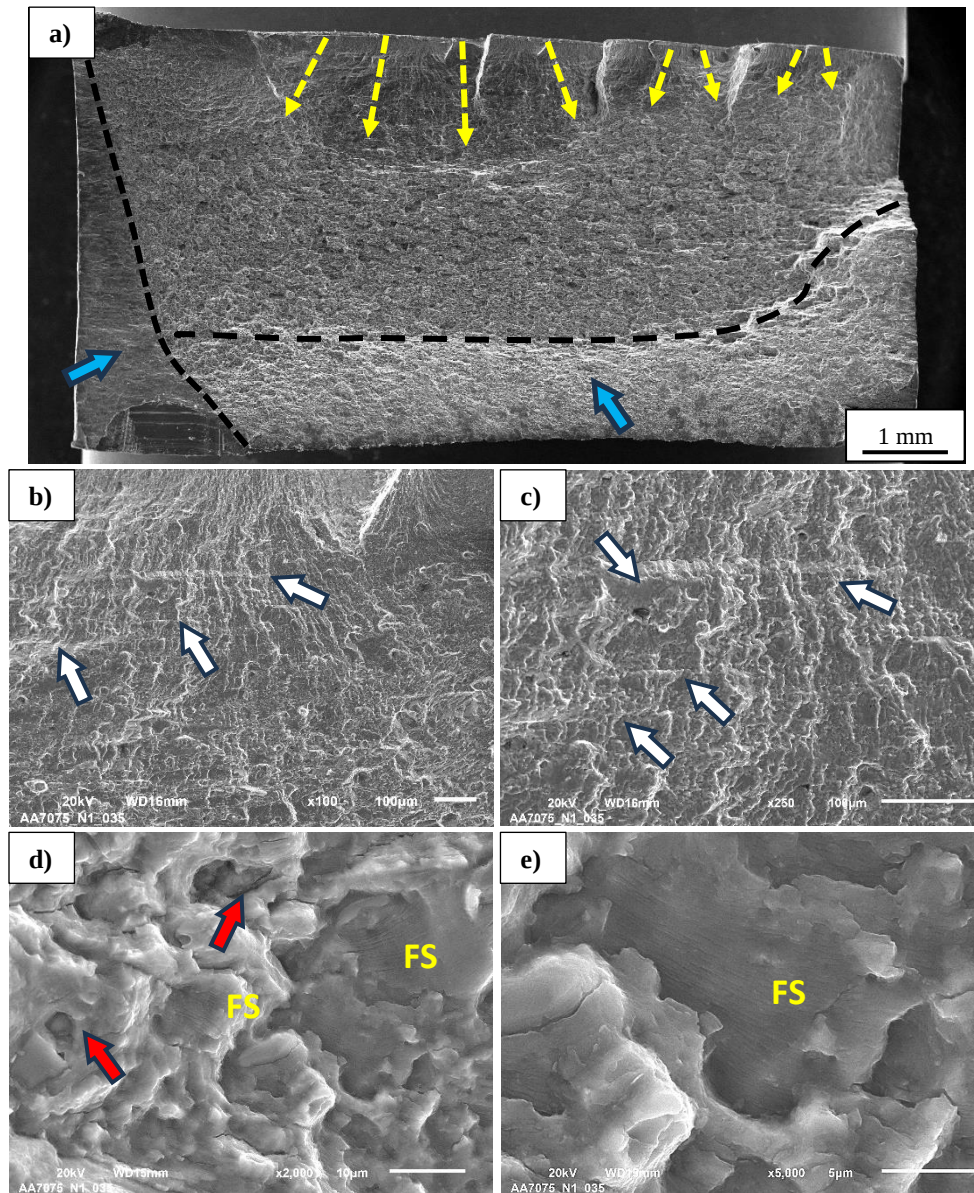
The fatigue fracture surface of AA7075 alloy FSW joint subjected to LCF under $\epsilon_{ac}=0.35\%$; general view (a), area of stable growth (b,c), details of the fracture surface (d,e)
